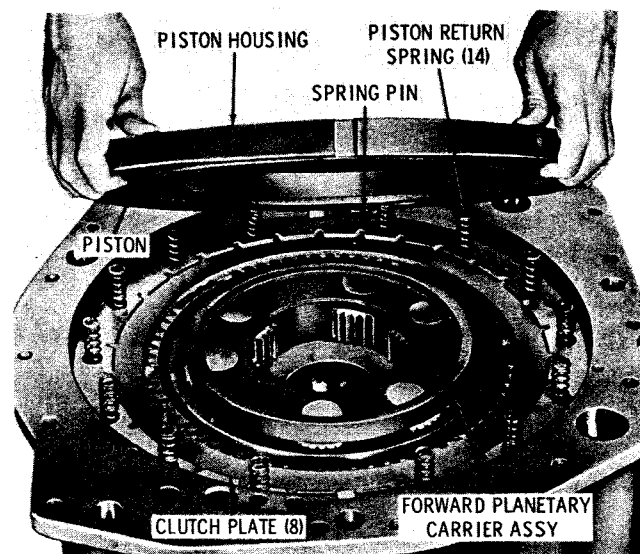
Installing forward clutch piston housing (5631 models)
